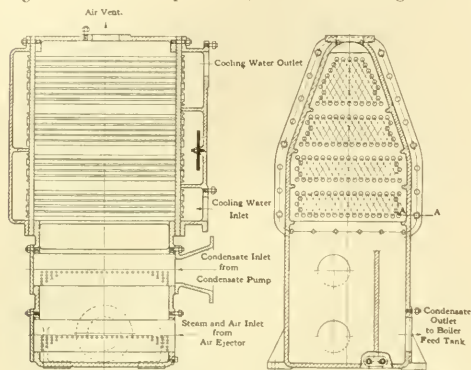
SECTION THROUGH MAIN CONDENSER AIR SEPARATOR
